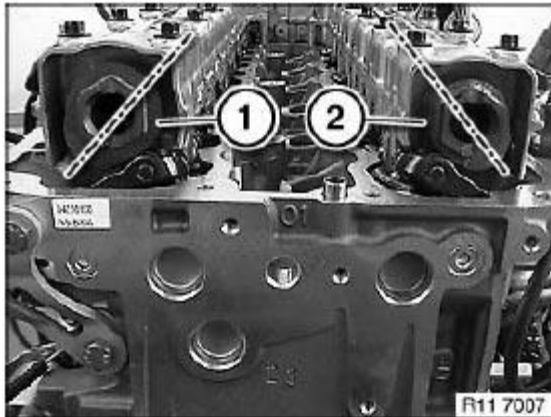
Identifying Cams Of Inlet And Exhaust Camshaft
